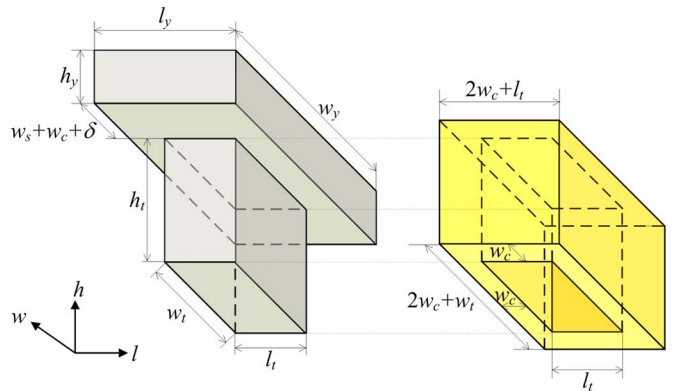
Schematic view and dimensions of PMSLM yoke-tooth assembly and tooth coil.
